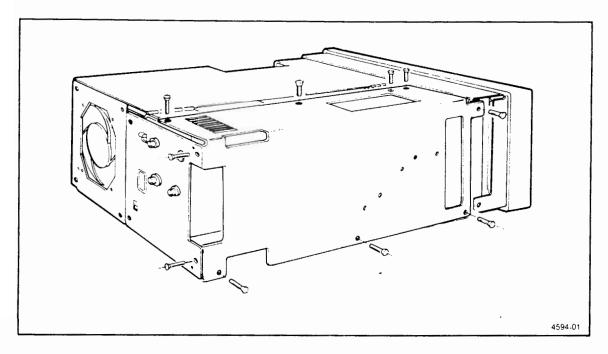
Location of screws for CRT Drive Board bracket removal. You only need to remove the CRT Drive Board bracket when it is necessary to access the Power Supply for current limit adjustments.
